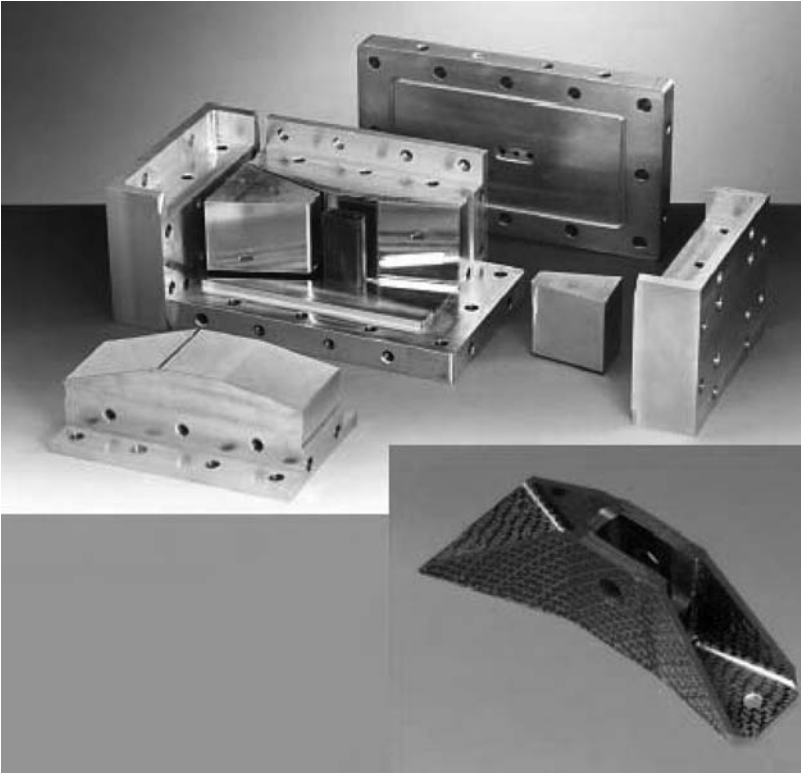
Matched-metal resin transfer molding (RTM) die complexity
